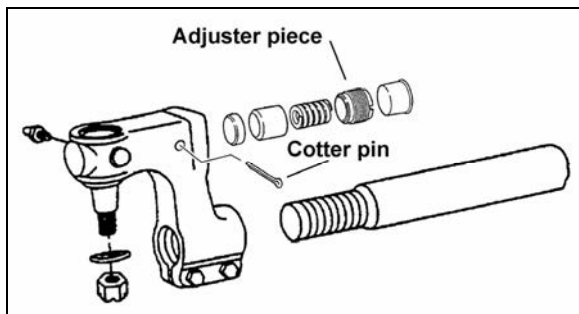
TIE ROD END PLAY ADJUSTMENT 10029
